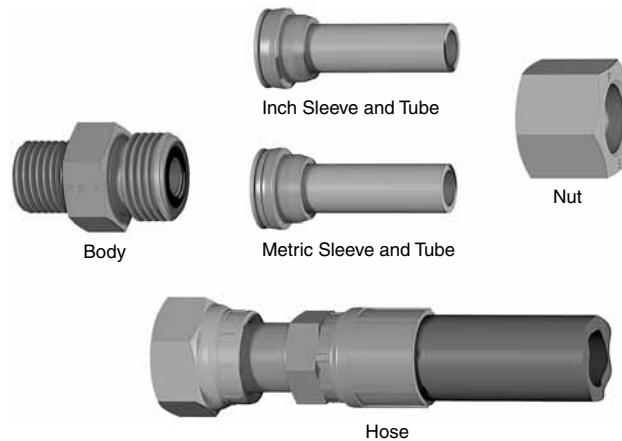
Seal-Lok Works with Inch or Metric Tube and Hose
